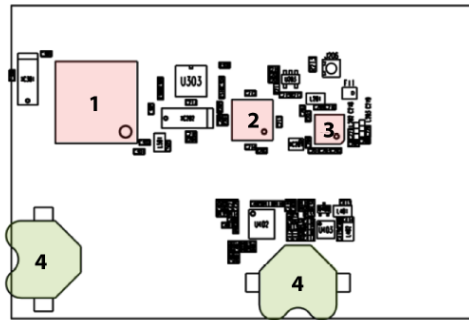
AVRRZRaven Back Assembly - Showing the primary components: 1. ATmega3290, 2. ATmega1284P, 3. AT86RF230B
